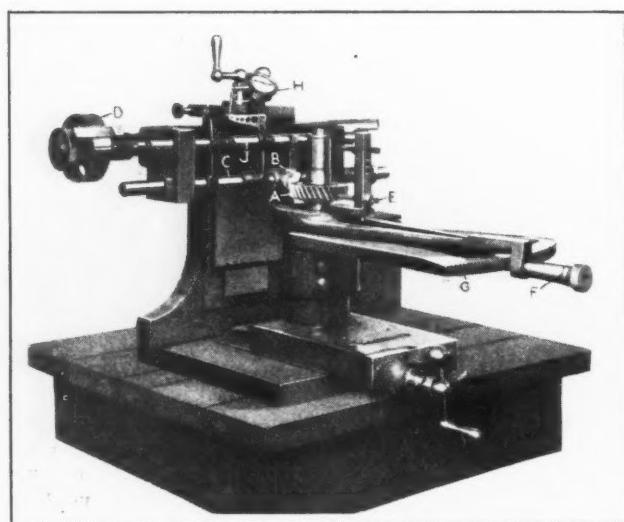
Special Machine used for checking the Involute of Teeth on Spur or Helical Gears and Gear-shaper Cutters
